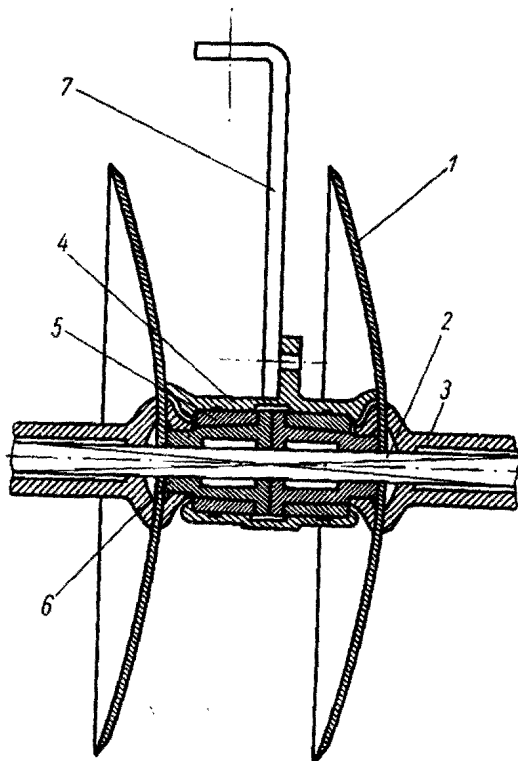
Disk-harrow's shaft provided with bearings: 1—disk; 2—square shaft; 3—distance sleeve; 4—bearing housing; 5—bearing bushing; 6—sleeve; 7—outrigger of a frame.
